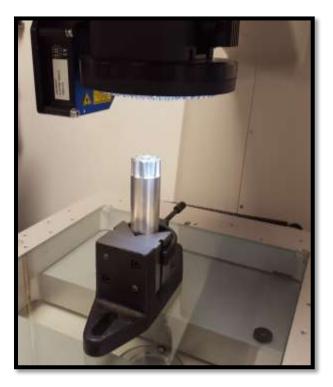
Input Shaft Inspected by Optical Scanner
